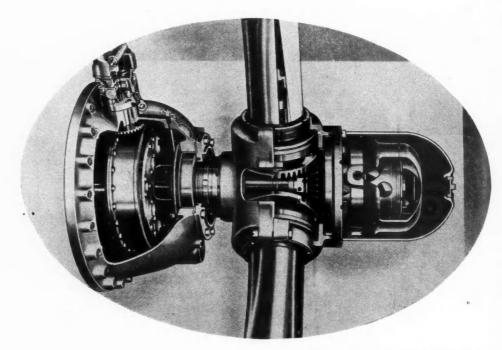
Cutaway view of Hamilton Standard Hydromatic propeller and constant-speed governor installed in the nose section of a Pratt & Whitney engine
